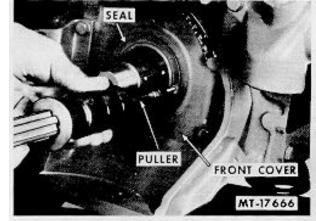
Front Cover Oil Seal Removal With Cover Installed Using SE-2091 Puller
